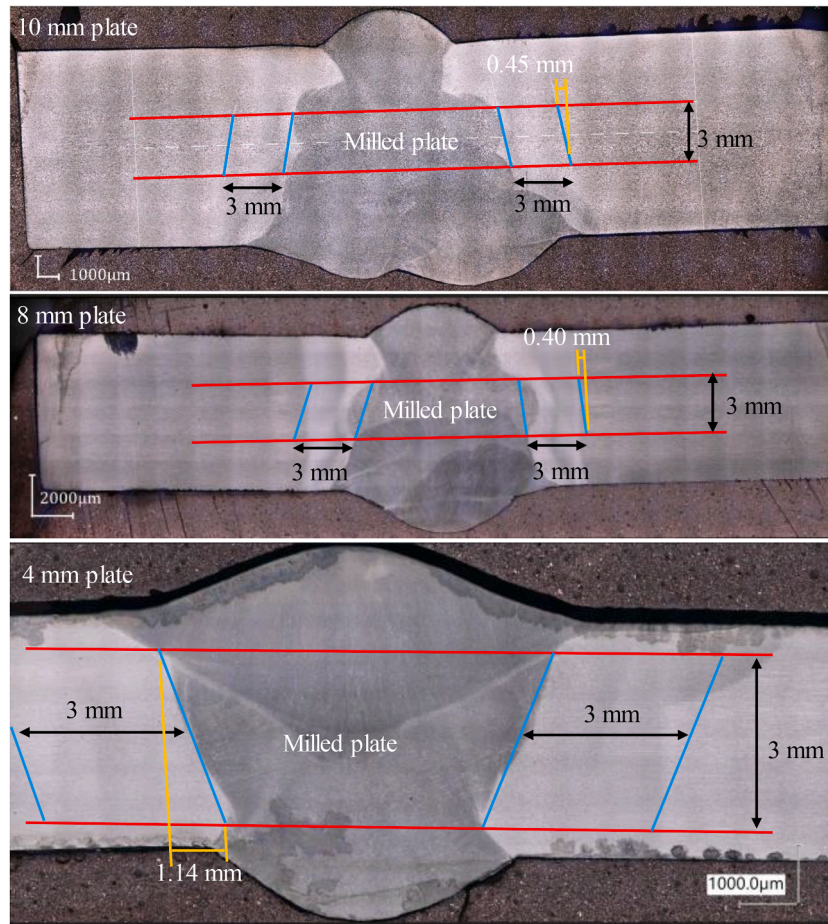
Inclined HAZ in the weld cross-sections.
